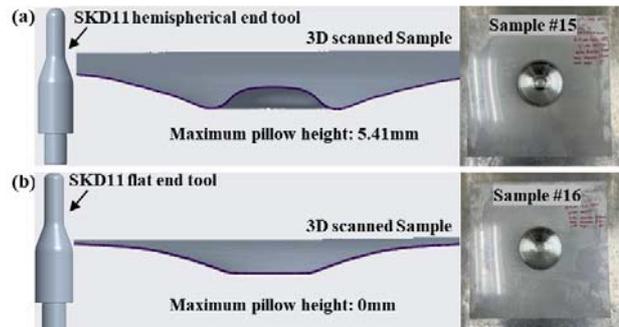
Effect of forming tool shape on pillow formation for different samples: (a) Samples #15 and (b) Samples #16.
